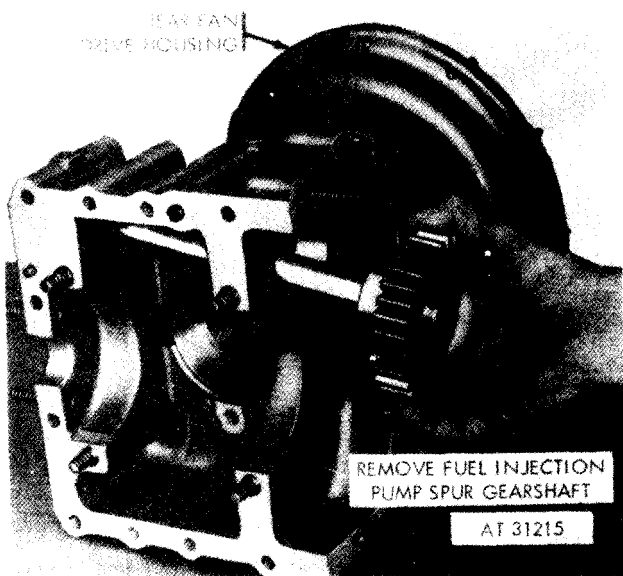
Removing or installing fuel injection pump spur gearshaft and bearing.
